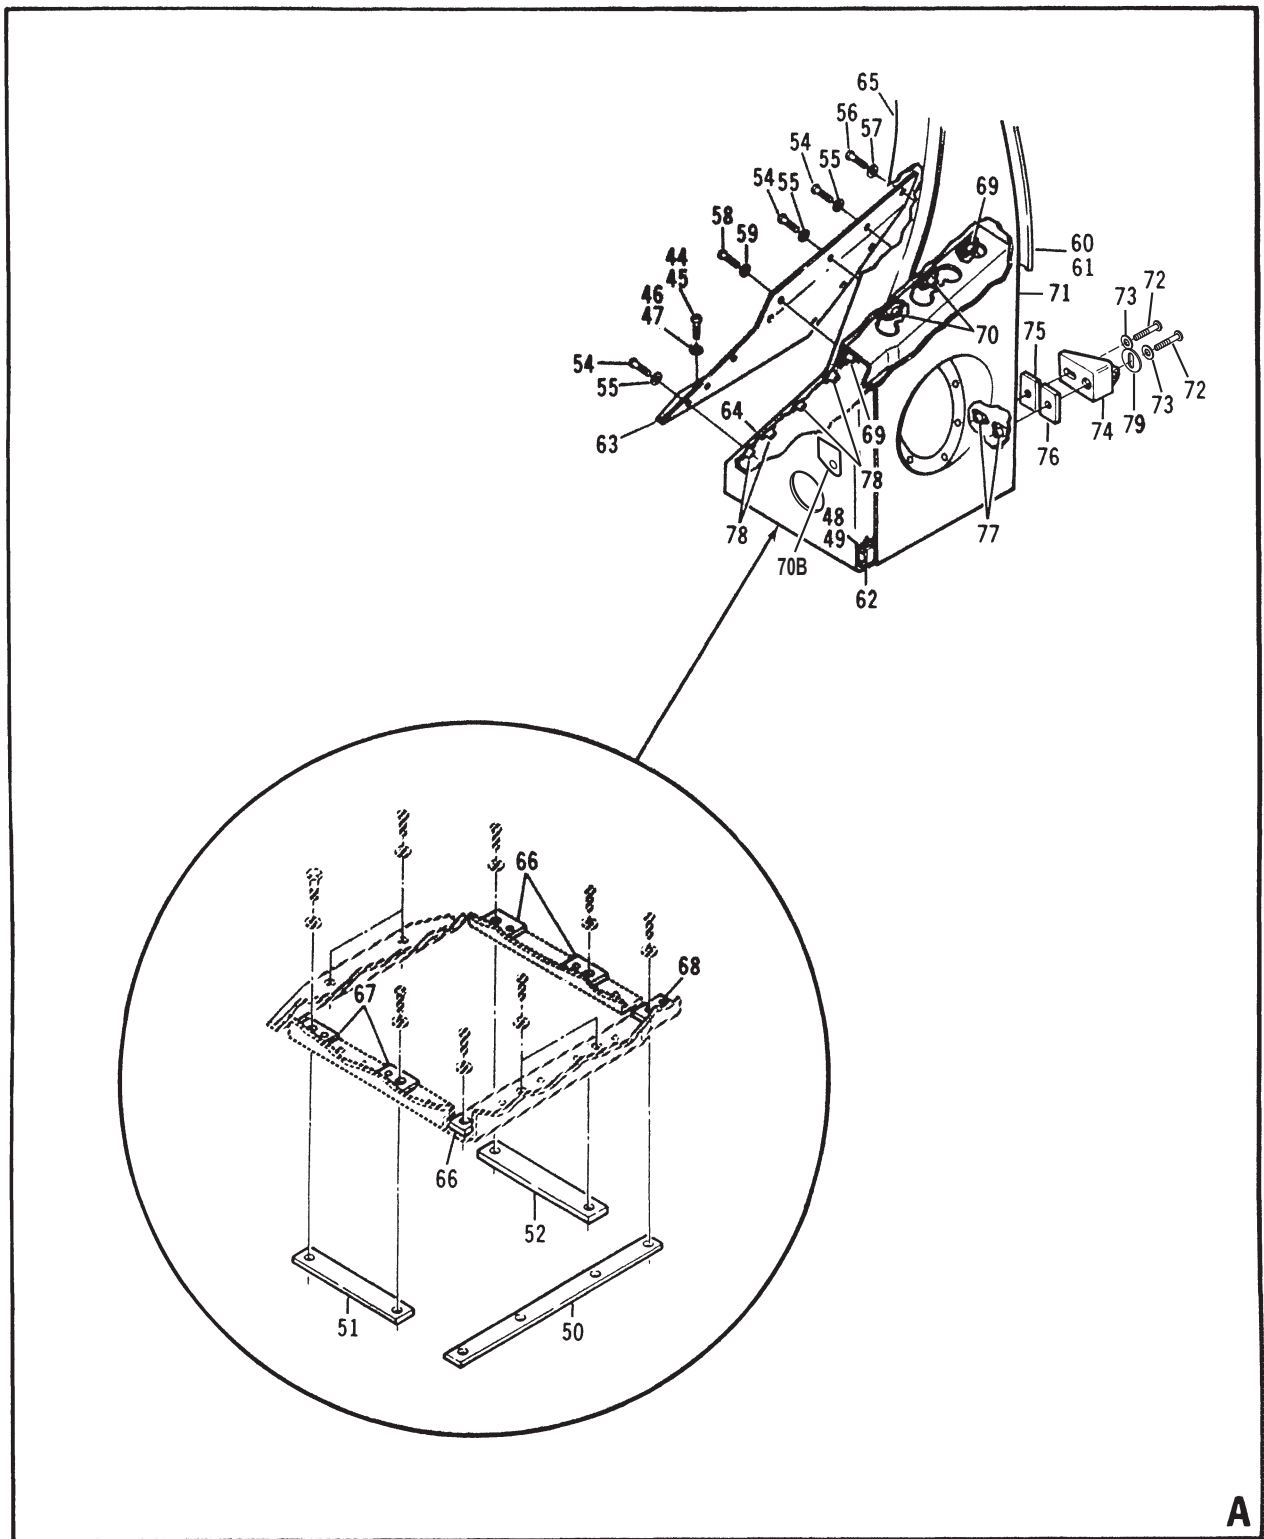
Cowling Installation (Sheet 2 of 2)
